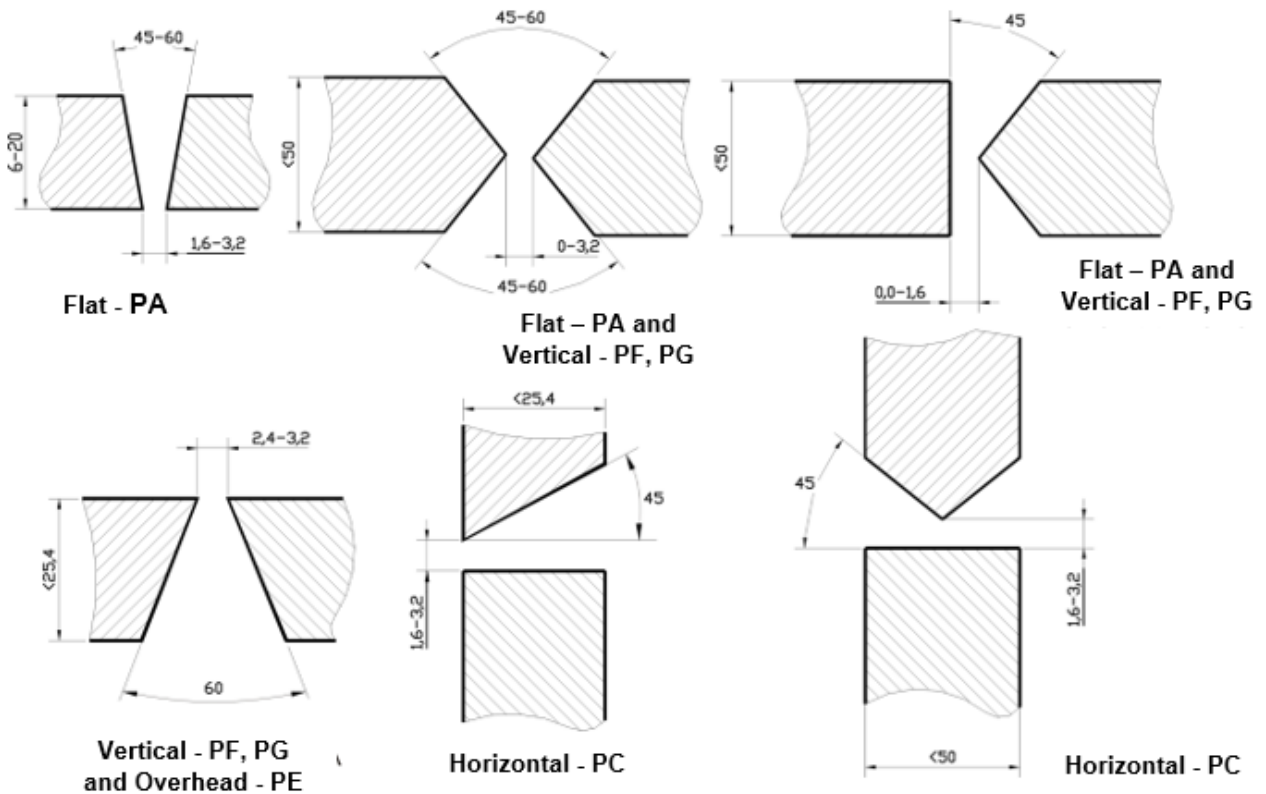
Typical butt welded joint designs for GMA welding in all positions [1, 2, 13-16]
